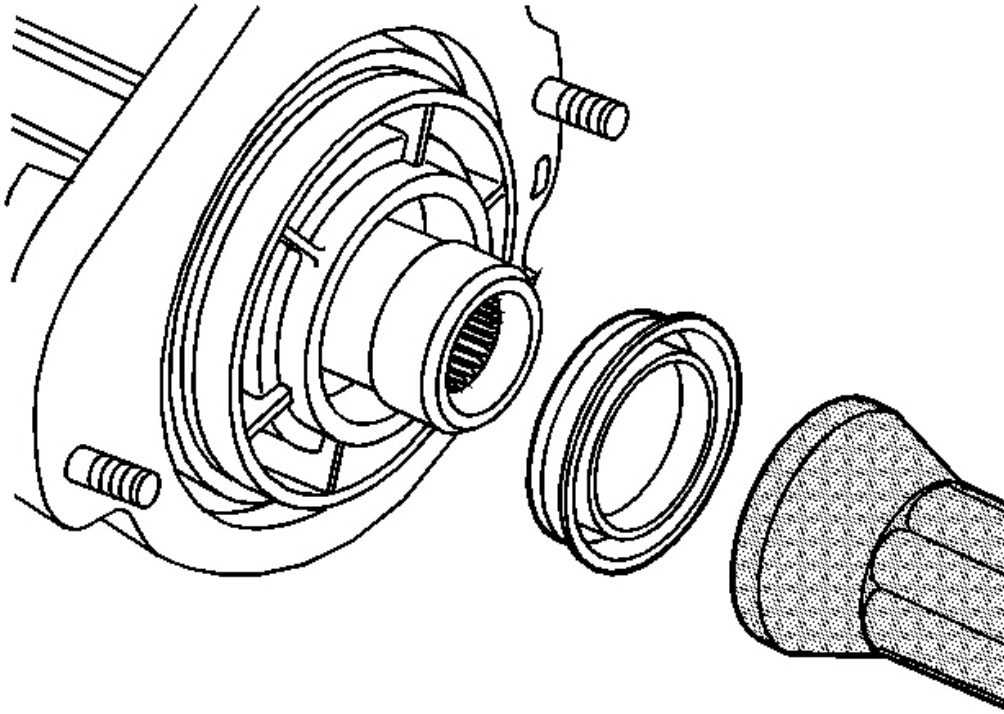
Installing J 45236-2 On Front Output Shaft
